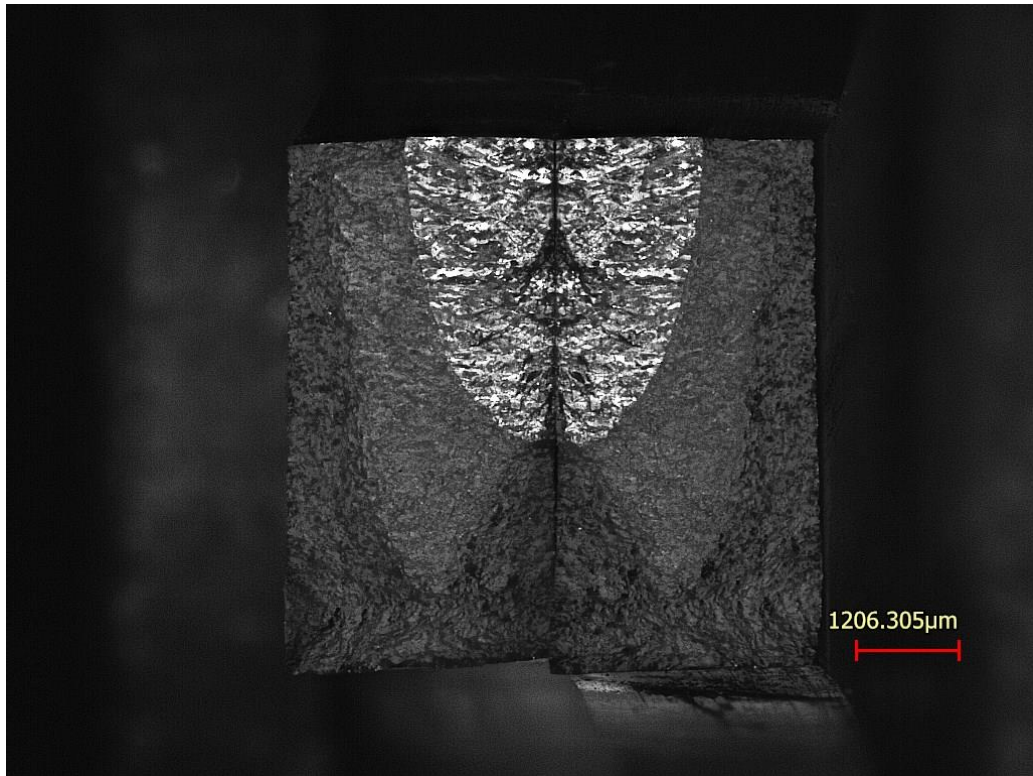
Specimen CS fracture surface (500,000 cycles : 67.06 ksi / 462.3 MPa)
